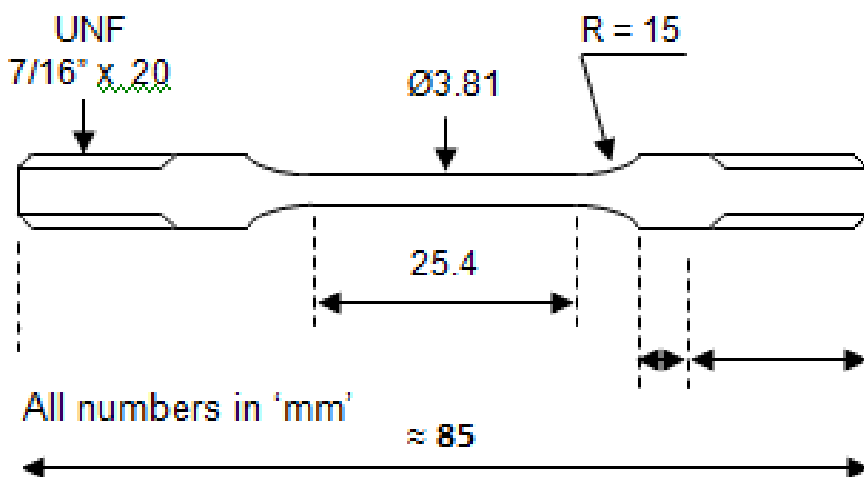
Dimensions of the threaded tensile specimen used in the CorTest.
